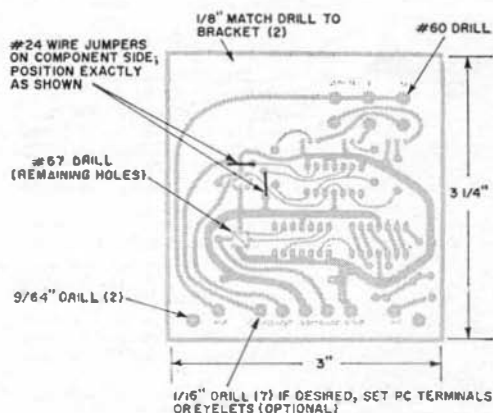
Proper location of hole centers and selection of drills are critical for the Gate module board. Once holes are drilled, immediately install jumpers.
